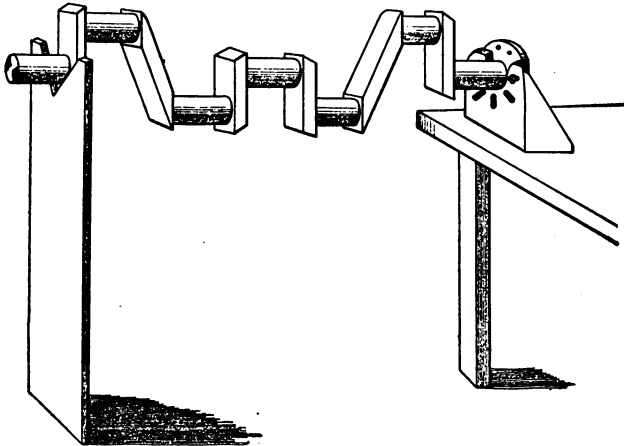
Set-Up for Supporting Crankshafts Out of Motor
